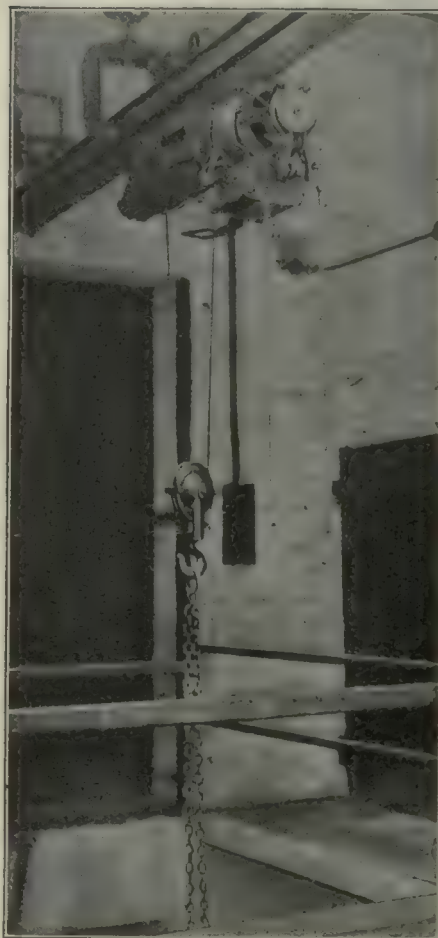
ELECTRIC FOUNDRY HOIST CONVEYING TO ELEVATOR SHAFT
